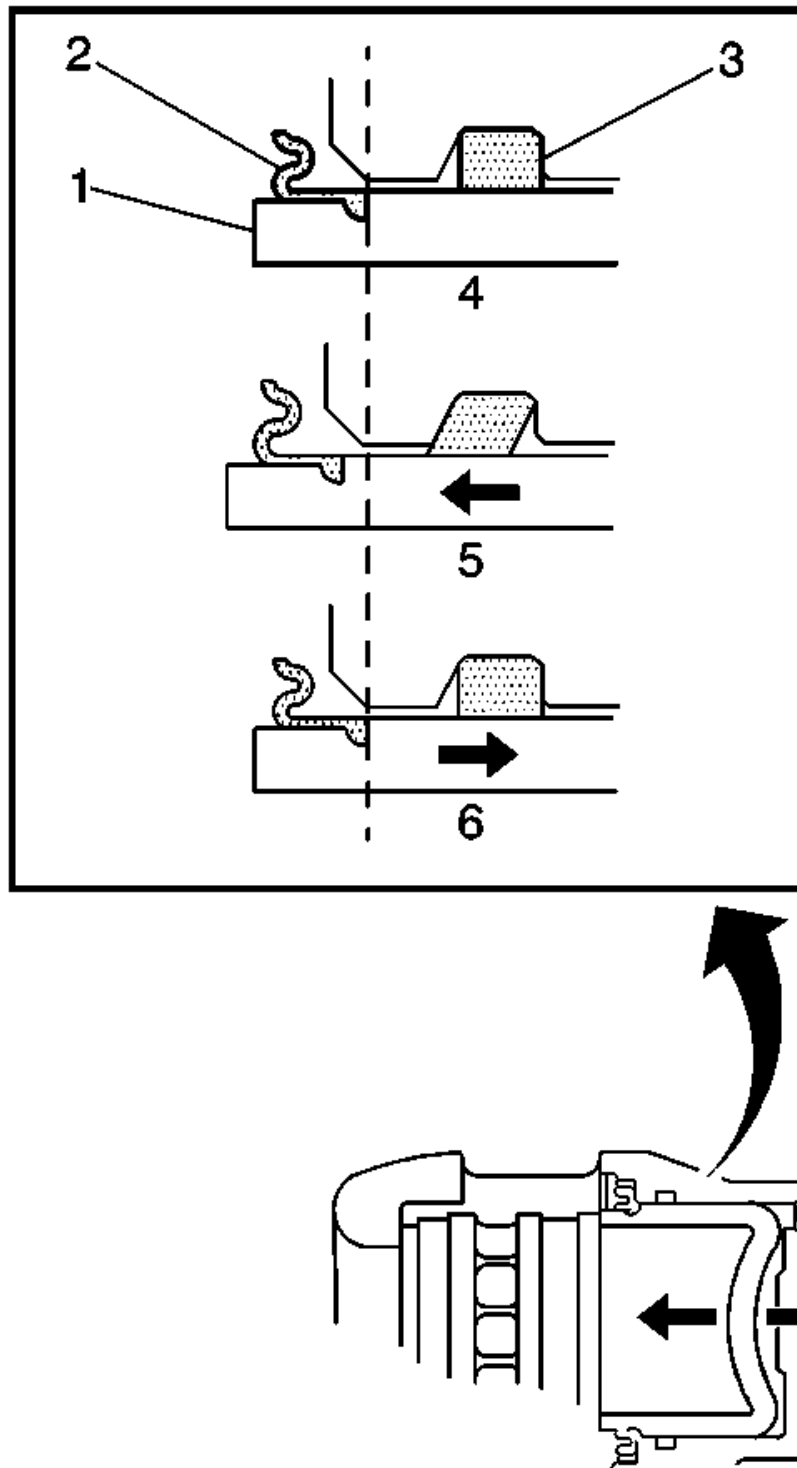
Identifying Brake Caliper/Pad Inspection Areas
